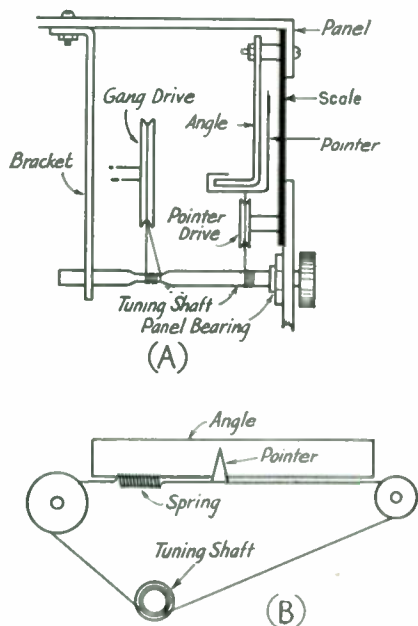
Sketches showing (A) side view, and (B) front view of the essential plan of the homemade dial mechanism for the mobile converter tuning control.
